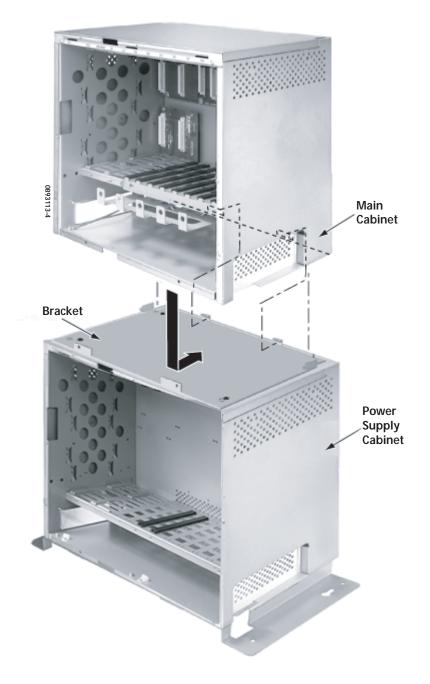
ATTACHING THE MAIN CABINET TO THE MOUNTING BRACKET
